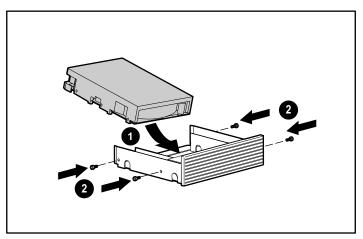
Installing a 3.5-inch hard drive into a 5.25-inch hard drive adapter
